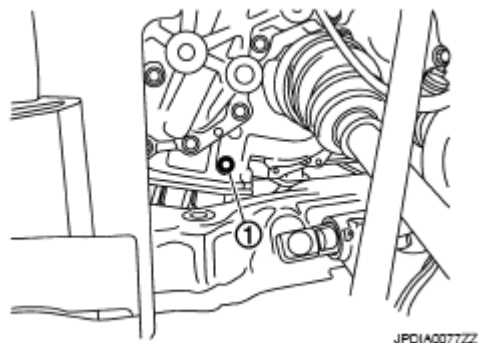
Identifying Transaxle Assembly, Oil Pump Fitting Bolt And O-ring With Torque Specifications
